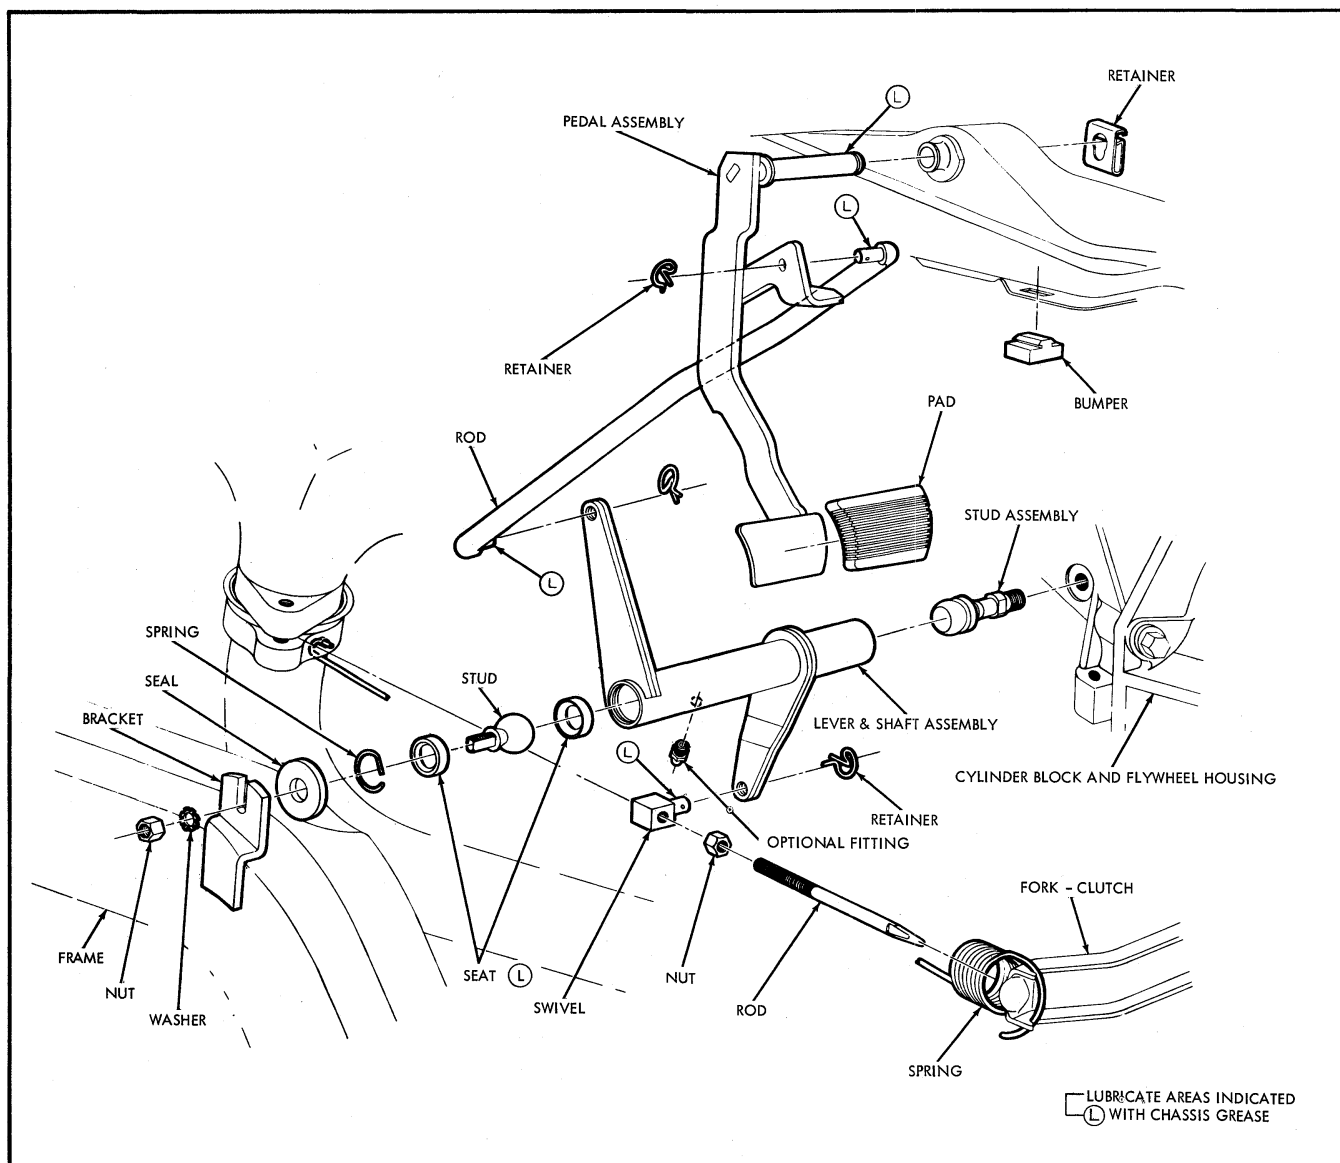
D-3 Clutch Control Linkage - 8 Cyl.
